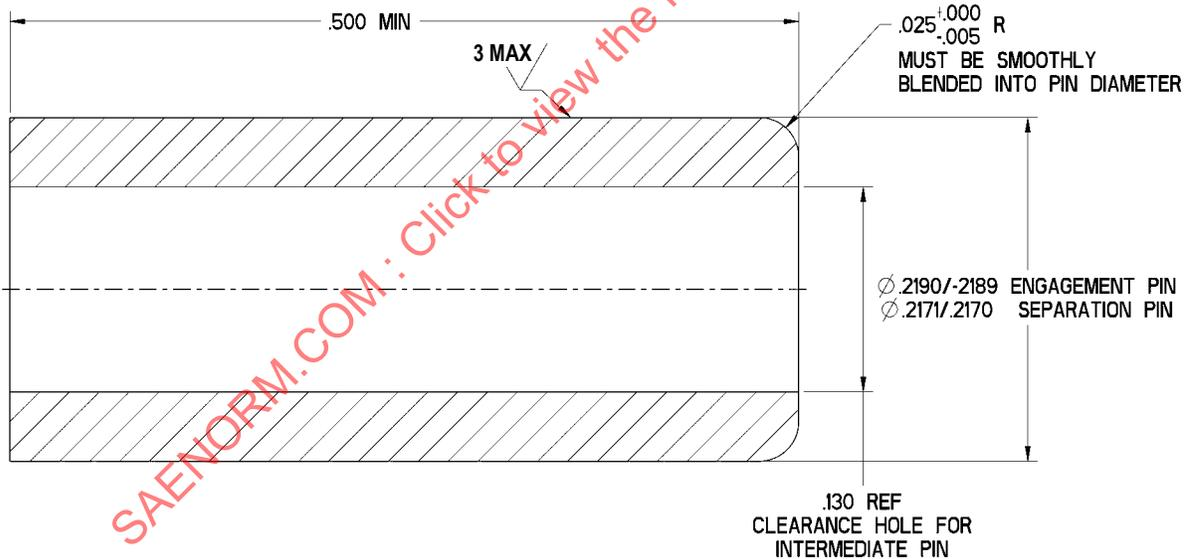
OUTER SOCKET ENGAGEMENT AND SEPARATION TEST PIN DIMENSIONS
